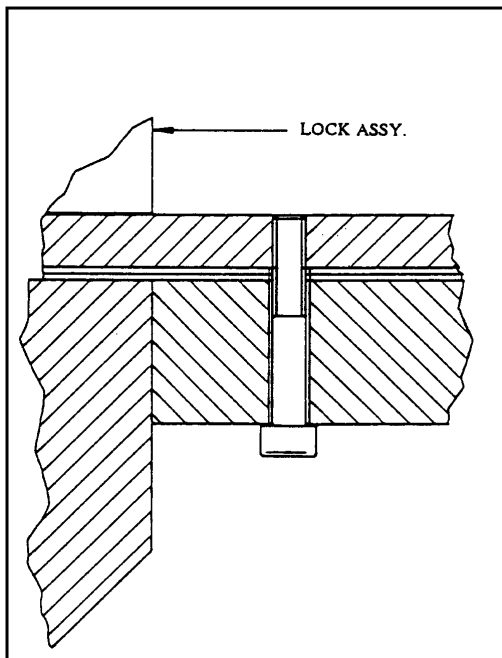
Bolt through flange to slide bracket with M8 Cap. Hd. bolts supplied.
